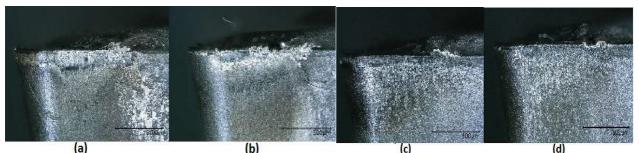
Flank wear for: (a) Dry machining; (b) Straight oil; (c) AFO; (d) Soluble oil
